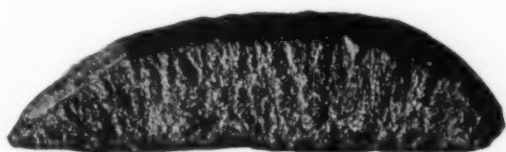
Sample No. 3, Fracture of Boston & Montana Copper. Wire-bar, contains 0.51 per cent Cu_2O . (Magnified 1.5 diam.)
